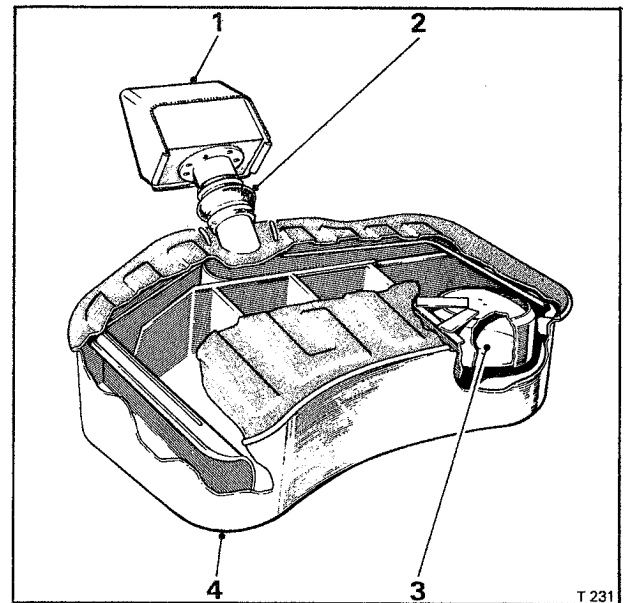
Fuel tank assembly (Other than U.S.A. and Canada)
